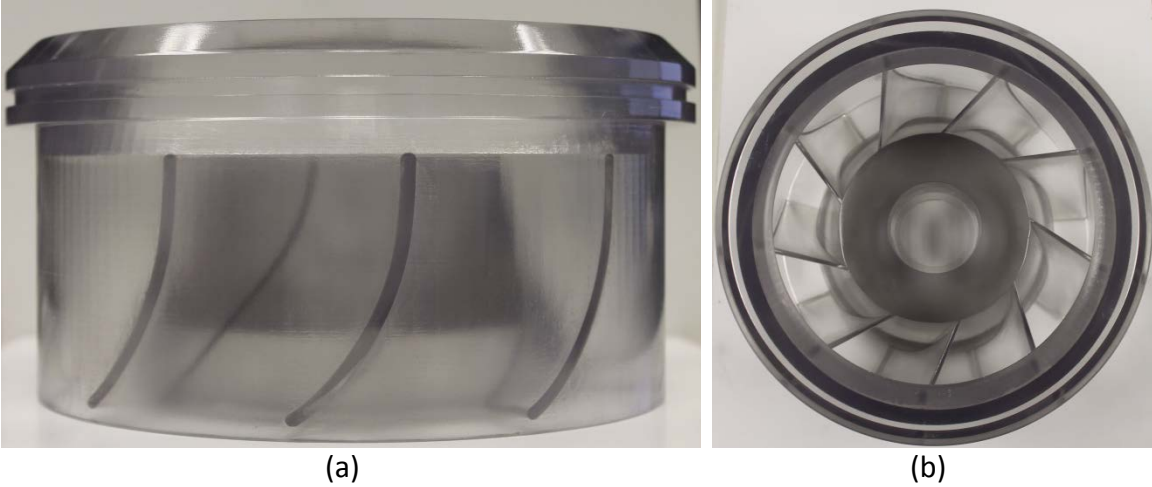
Picture of Clear Pump Diffuser a. Front View B. Top View
